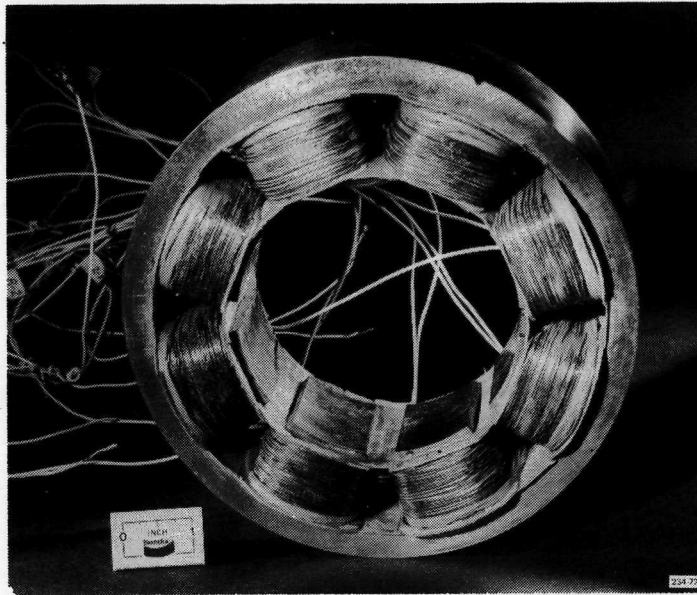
Stator and Coil Assembly (Flightweight)
